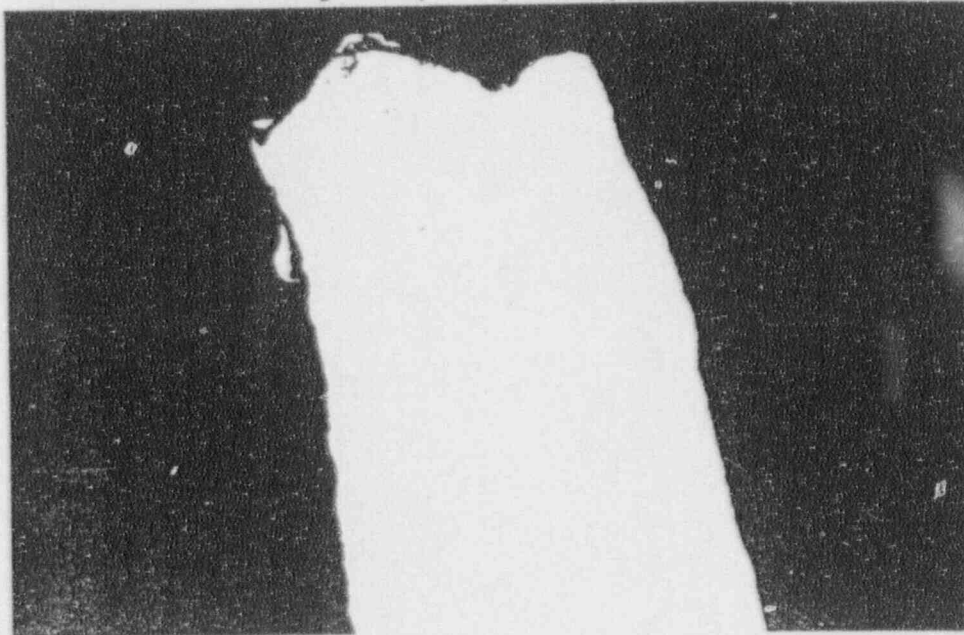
Cross-section through bellows, near center of crack. No parallel cracking visible near main fracture (top); minor 2° crack is mechanical damage. (500X) Mi-2637.
